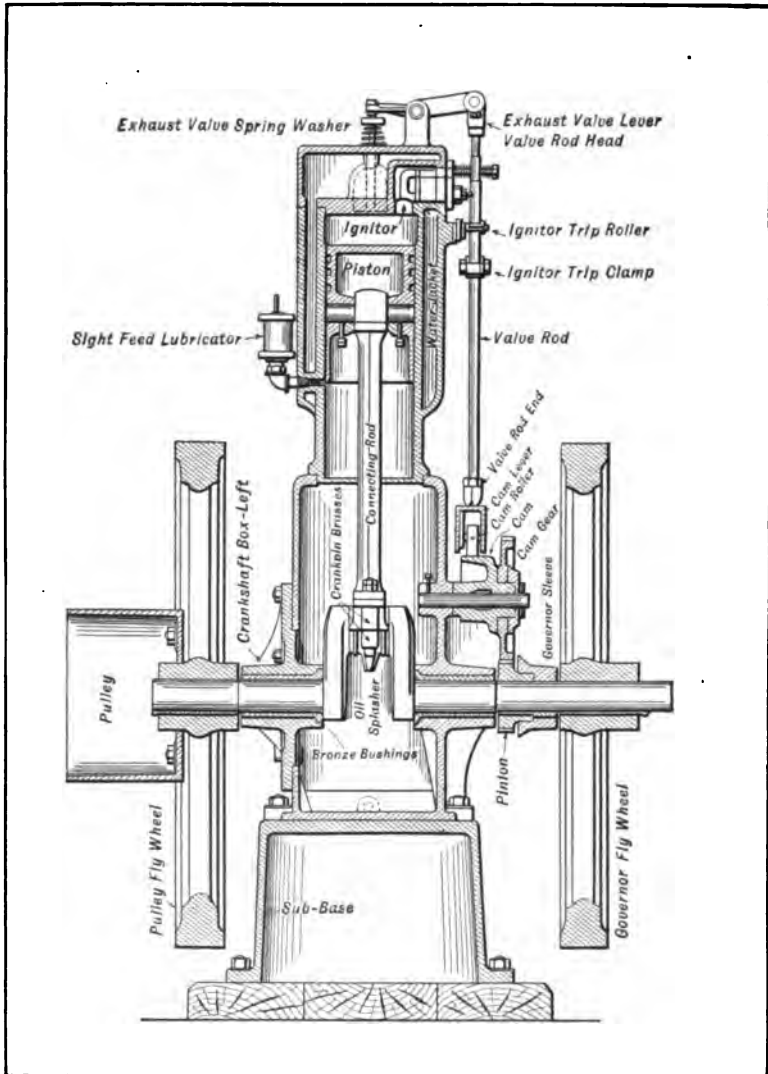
Sectional view of I. H. C. vertical cylinder farm motor.
